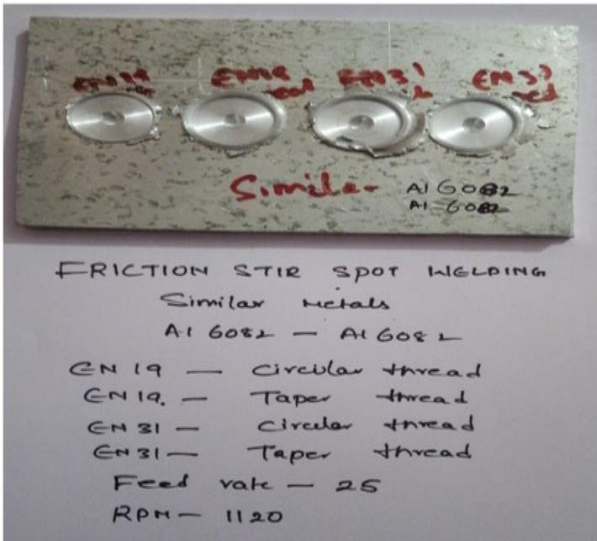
Friction stir spot welding with similar metals and its different tool and thread.
